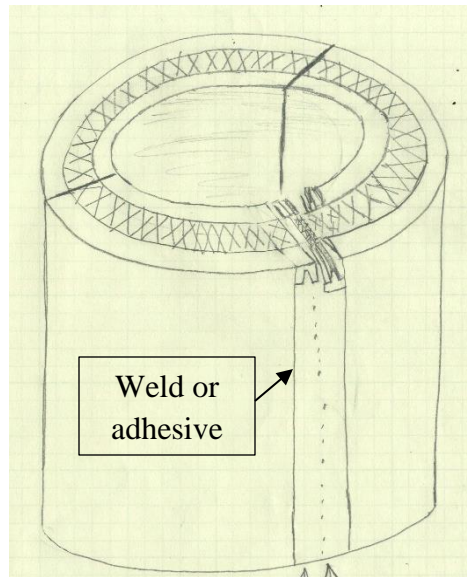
Hook joint weld (5a) and hook joint adhesive (5b)
